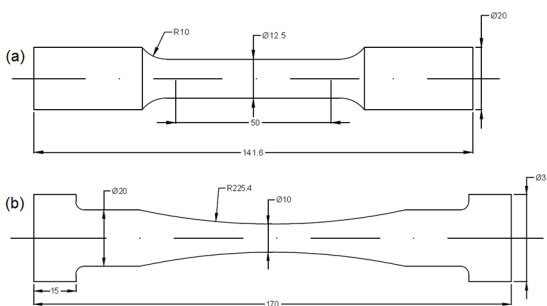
Dimensions of the Inconel 625 test specimens (a) tensile test (b) fatigue test.
